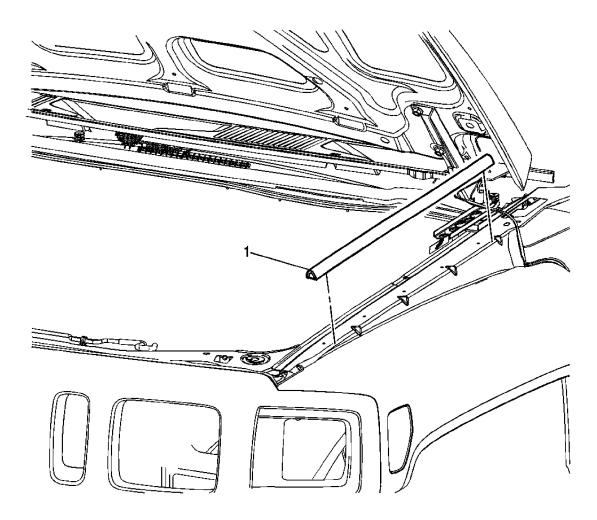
Replacing Fender To Hood Seal Courtesy of GENERAL MOTORS CORP.
